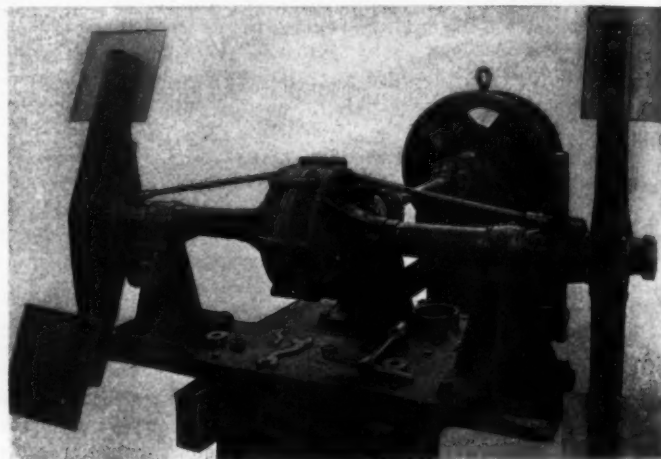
Testing a live rear axle after it is assembled to see if it will make noise, and to give it a test load
